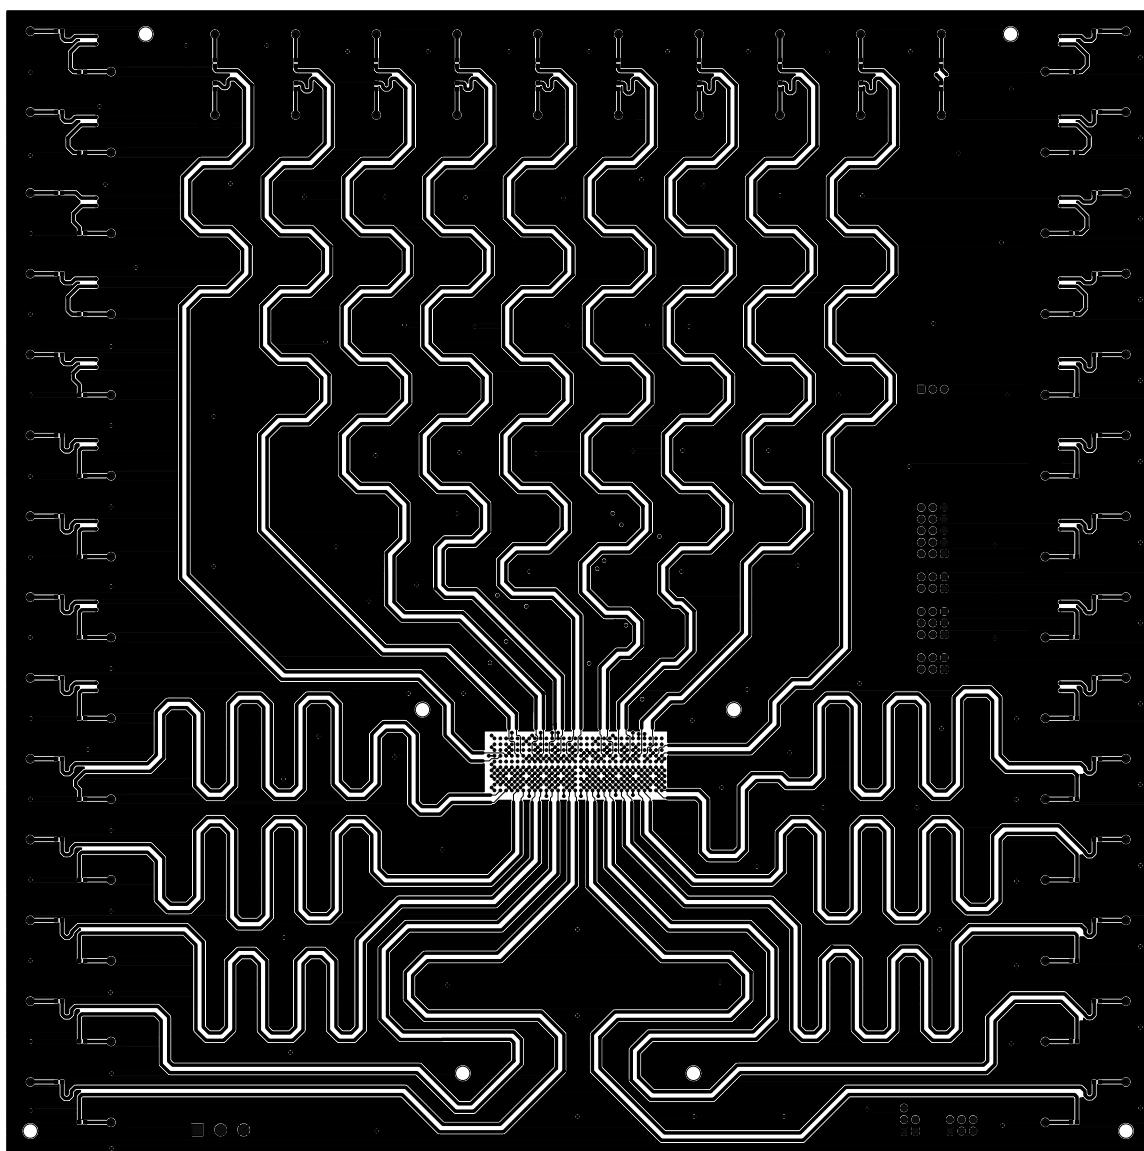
Layer 1—Component Side (Optional Full-Duplex Motherboard)
